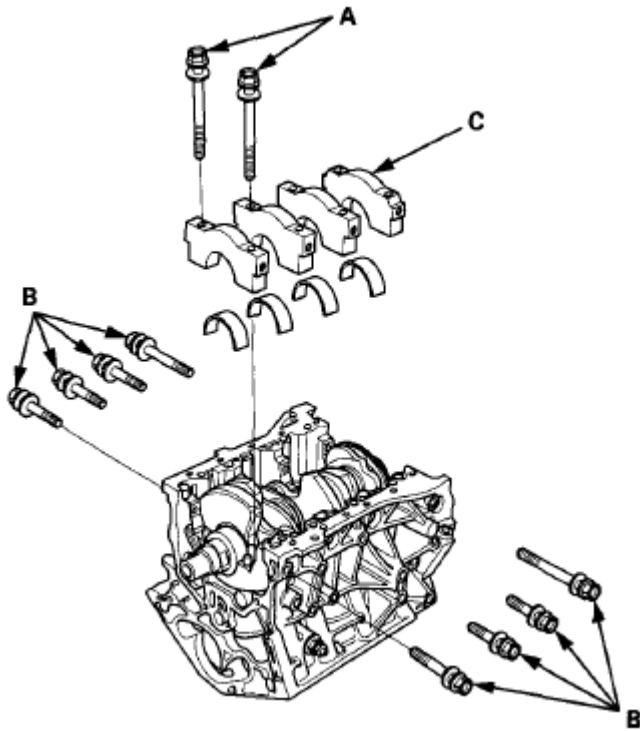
Identifying Main Bearing Caps, Bearing Cap Bolts And Side Bolts
